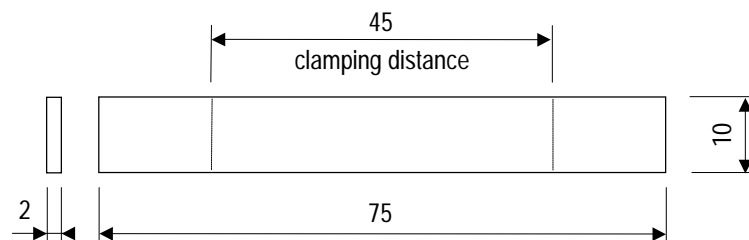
Dimensions of the tensile load-unload-reload test specimen
